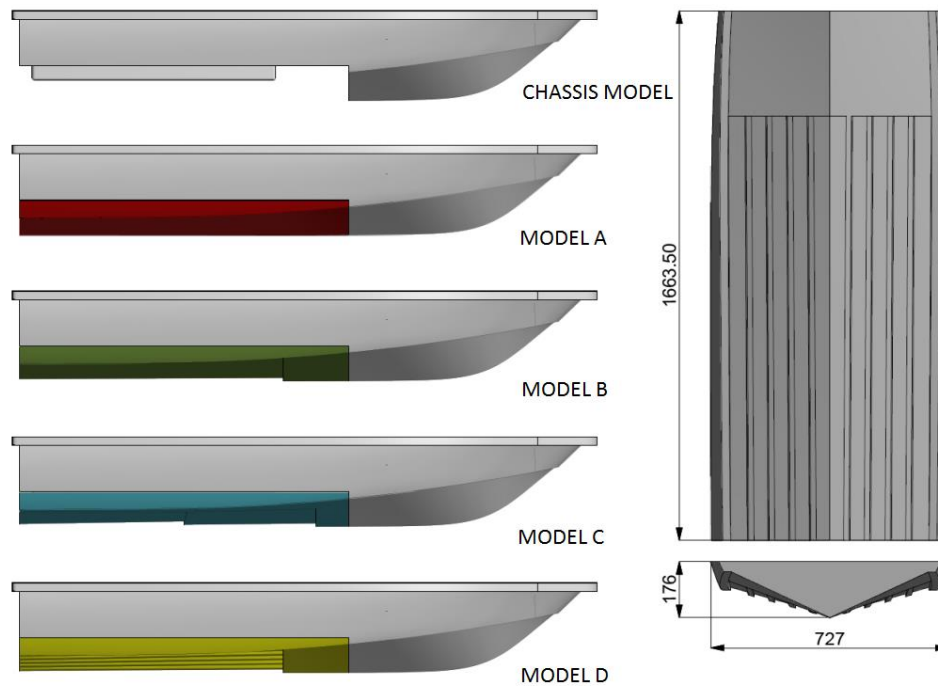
Chassis model and different bottom on left - Dimensions in mm of unified bottom on right
